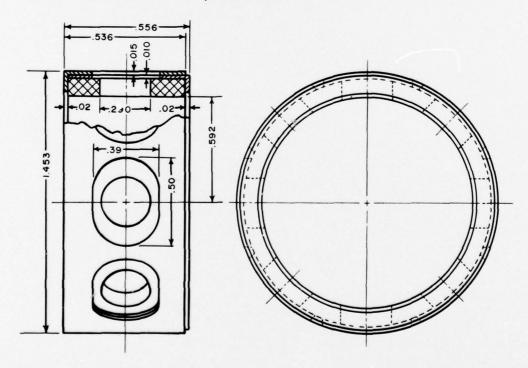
Size 204 Cage Design Using Double "L" Shroud
